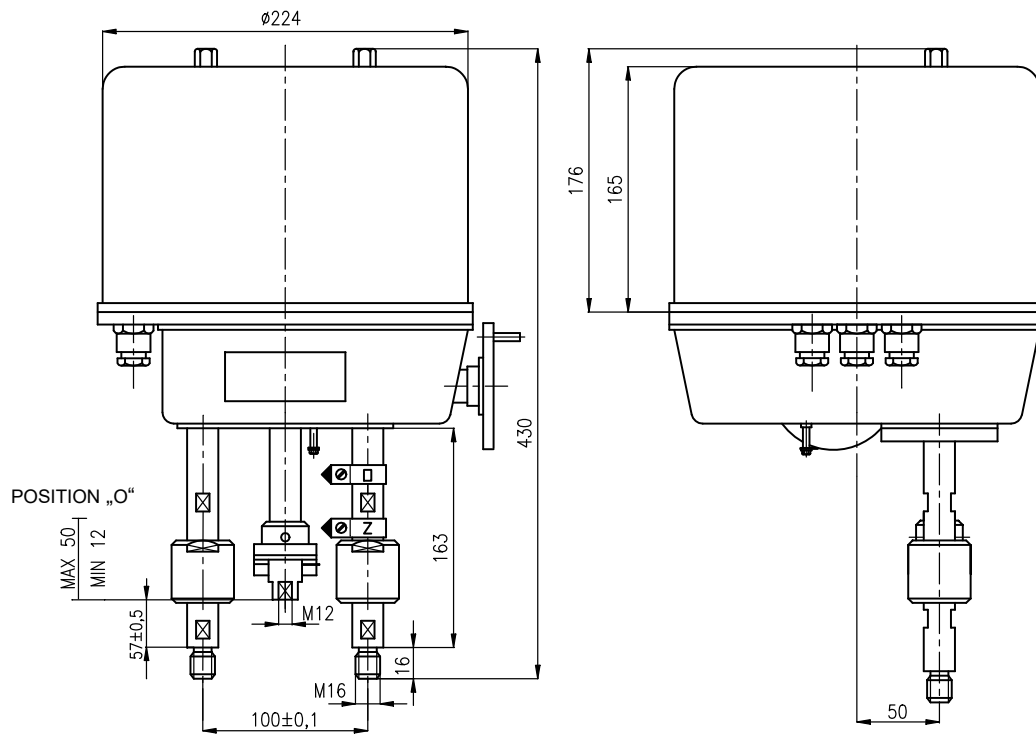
DIMENSIONAL DRAWING - CONNECTION P3
